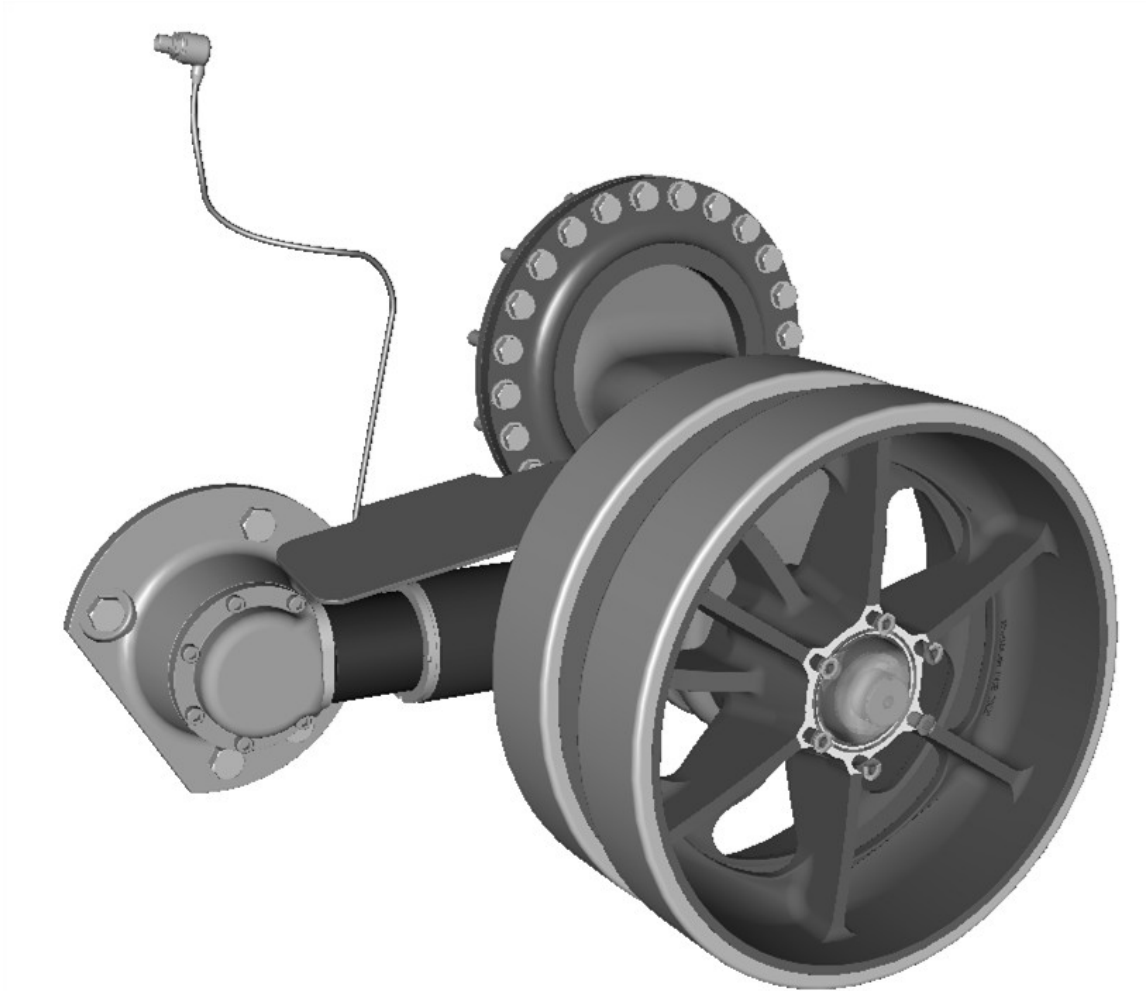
Solid Model Example of Parts Assembly Using Pro Engineer
